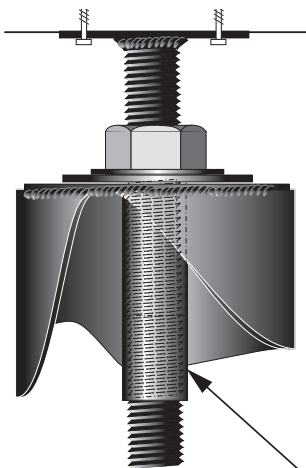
A tube just large enough to fit over the adjusting screw is welded inside the pipe to the end plate. This helps resist tipping of the screw due to lateral forces.
